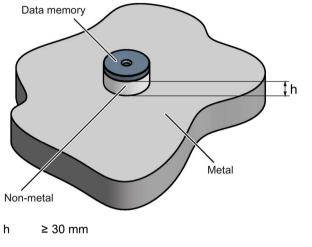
Mounting the MDS D139/D339 on metal with spacer
